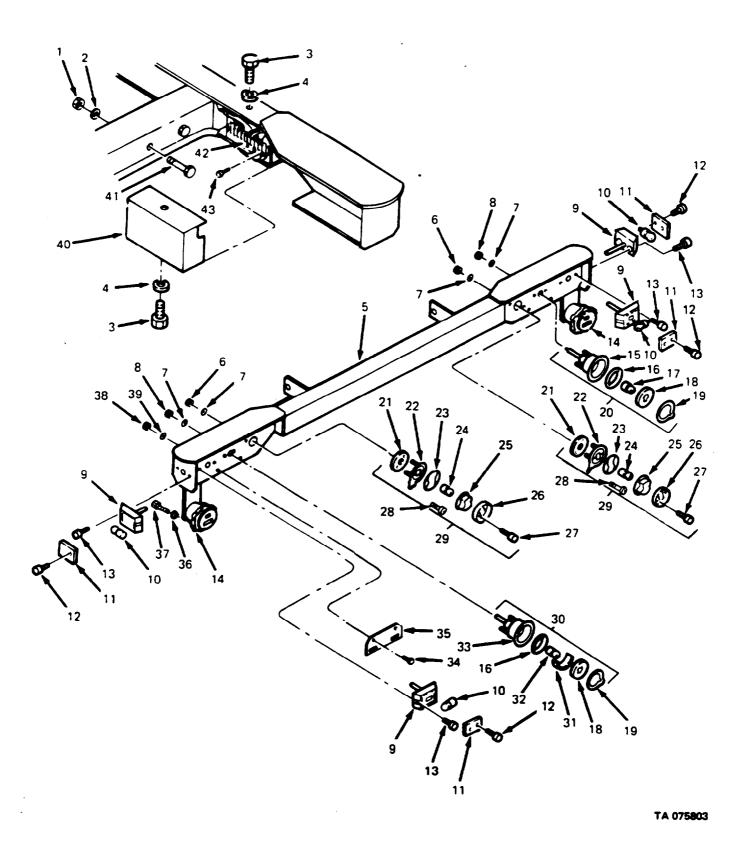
Remove/Install Loom Bumper and Marker Lamps (Sheet 1 of 2).
